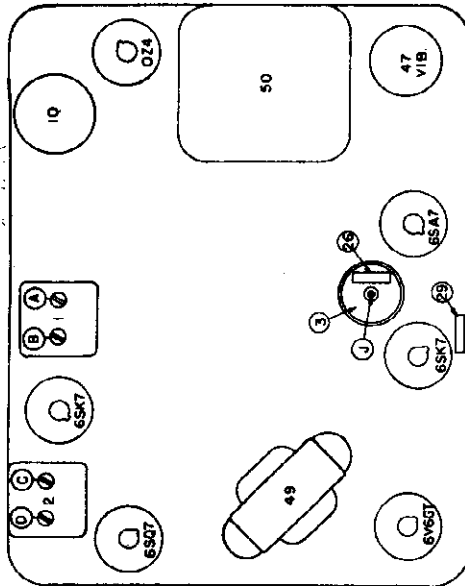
PARTS LAYOUT--DASH UNIT--Top View
